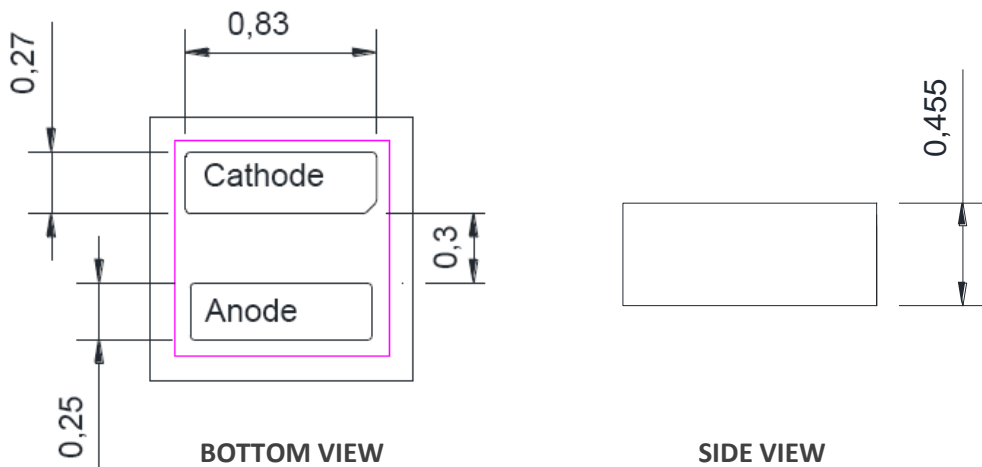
WICOP Z8Y11 Solder Pad Dimensions.
